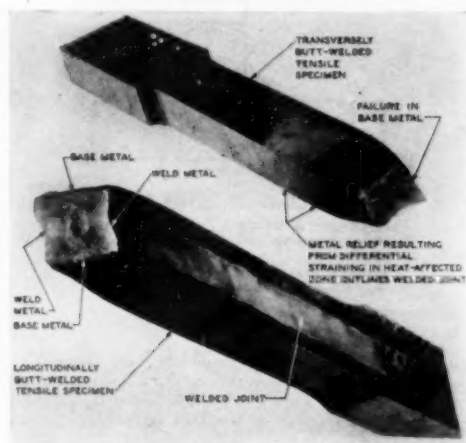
TYPICAL FRACTURES IN BUTT-WELDED TENSILE SPECIMENS OF 1-IN. QUENCHED-AND-TEMPERED T-1 STEEL (E12015 electrodes.)
